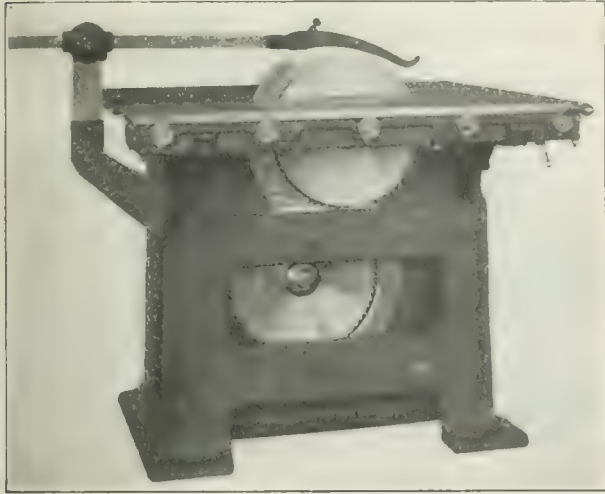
The Improved No. 60 Universal Saw Bench Built by the Oliver Machinery Company, Grand Rapids, Mich.
